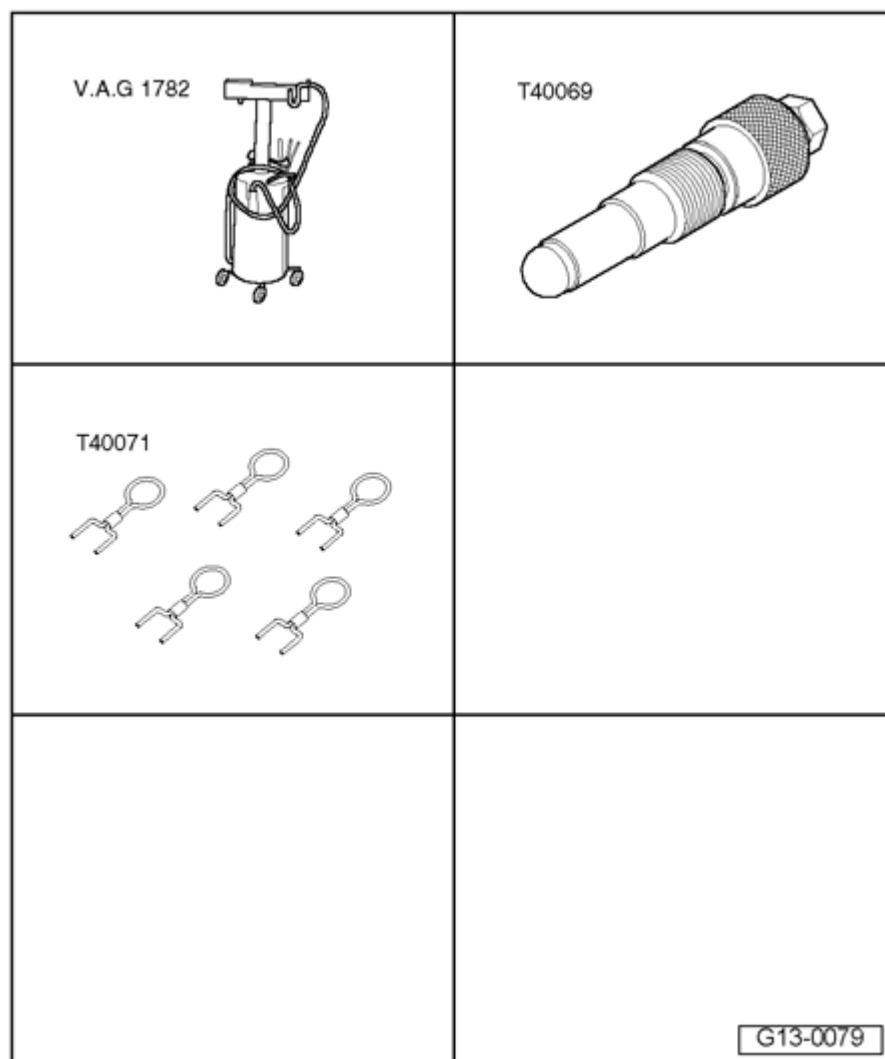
Identifying Special Tools - Timing Mechanism Drive Chain, Removing And Installing
